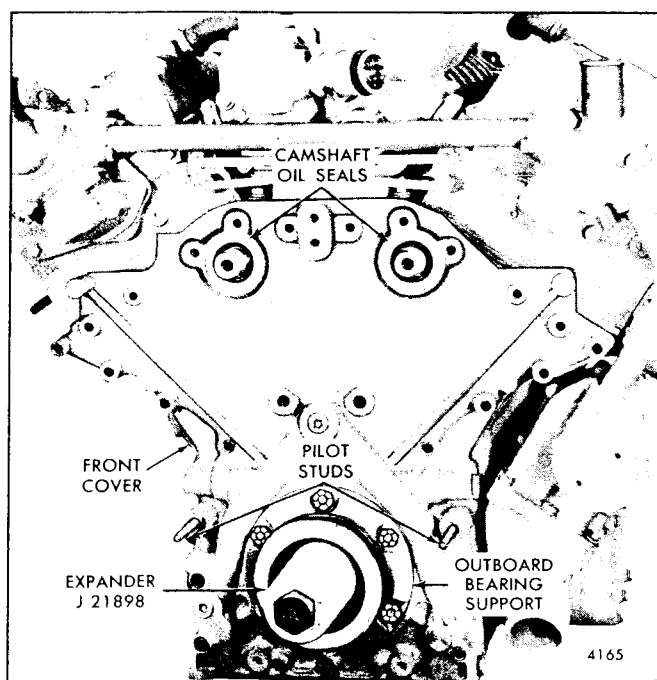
Installing Engine Front Cover - 8V-Engine
